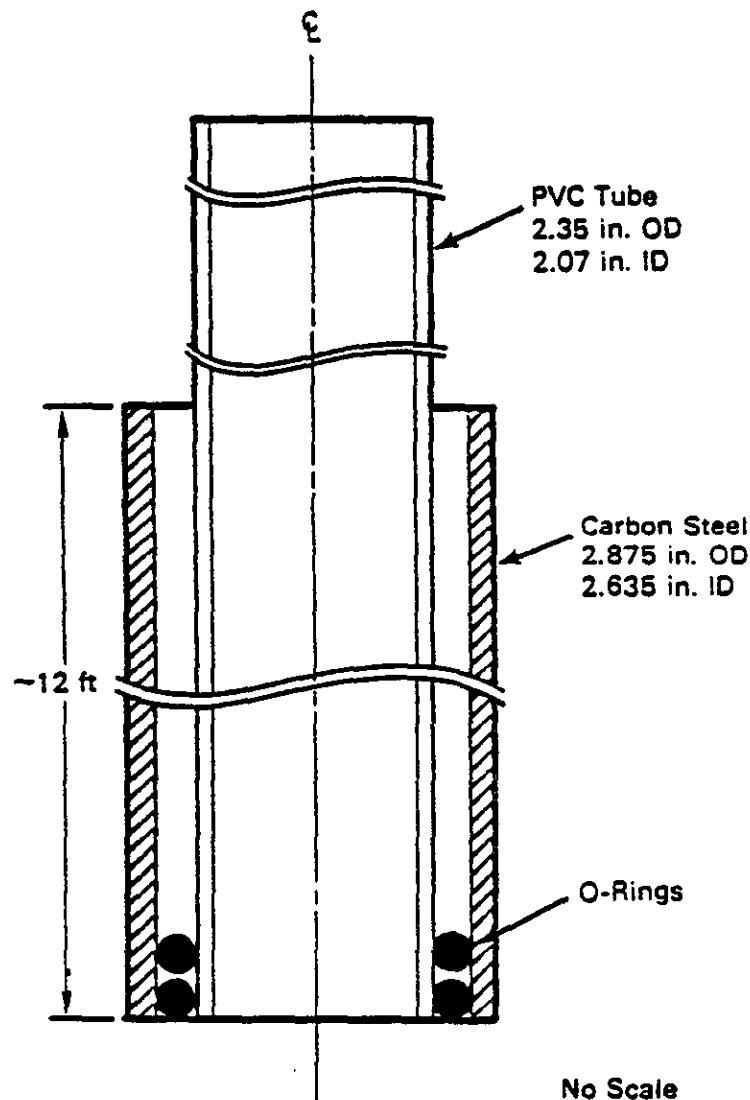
Grout Sampler Designed for Pilot-Scale Test
